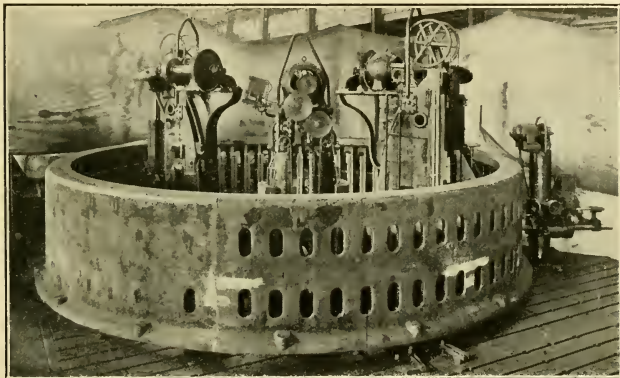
APPLICATION OF MOTOR TO MACHINE TOOLS ON IRON FLOOR PLATE
